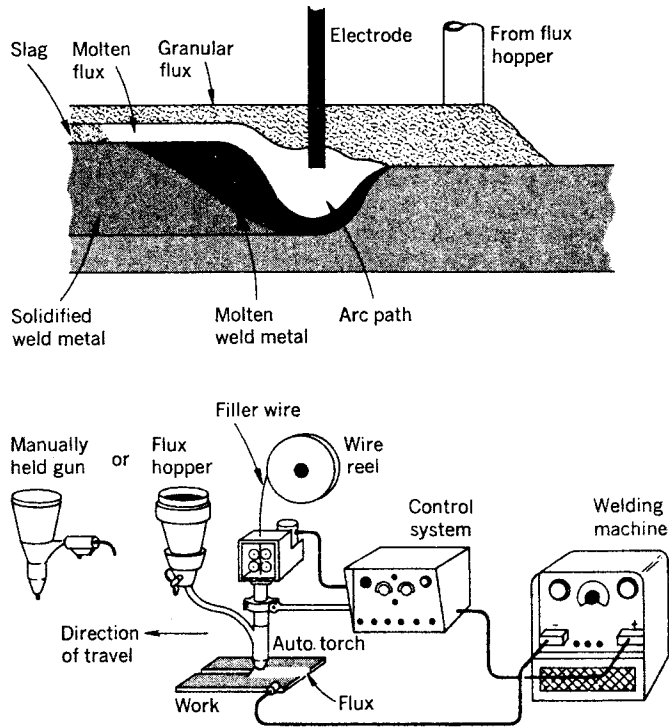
Submerged-Arc Welding, SAW (1)
